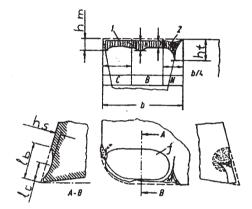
Cutting edge wear parameters and designations, where: C, B, N – wear areas; l_b – length of wear hole; l_c – distance to the center of the wear hole; h_s – depth of the wear hole; h_m – flank wear; h_t – shock load wear; f – dimple wear form. [19].
